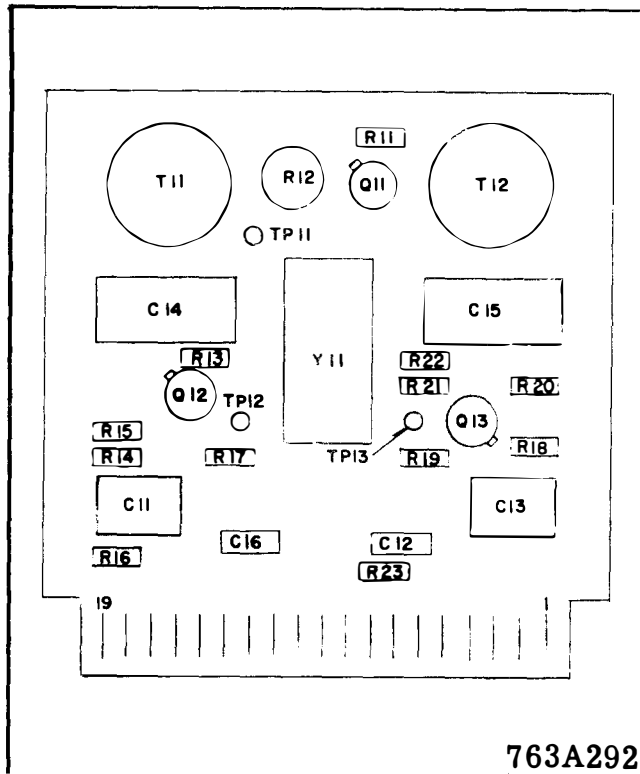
Component locations on the oscillator and mixer printed circuit board.
